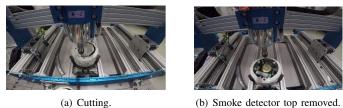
Removal of plastic cover from a smoke detector with a CNC milling machine.
